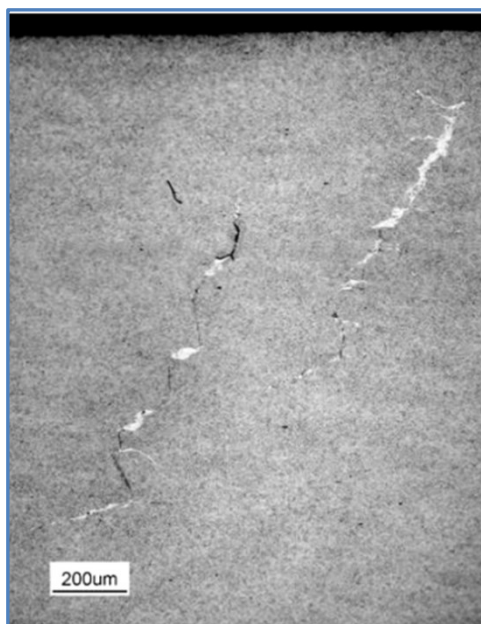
Subsurface WECs in a failed bearing from a high-speed shaft of a wind turbine gearbox [55]
